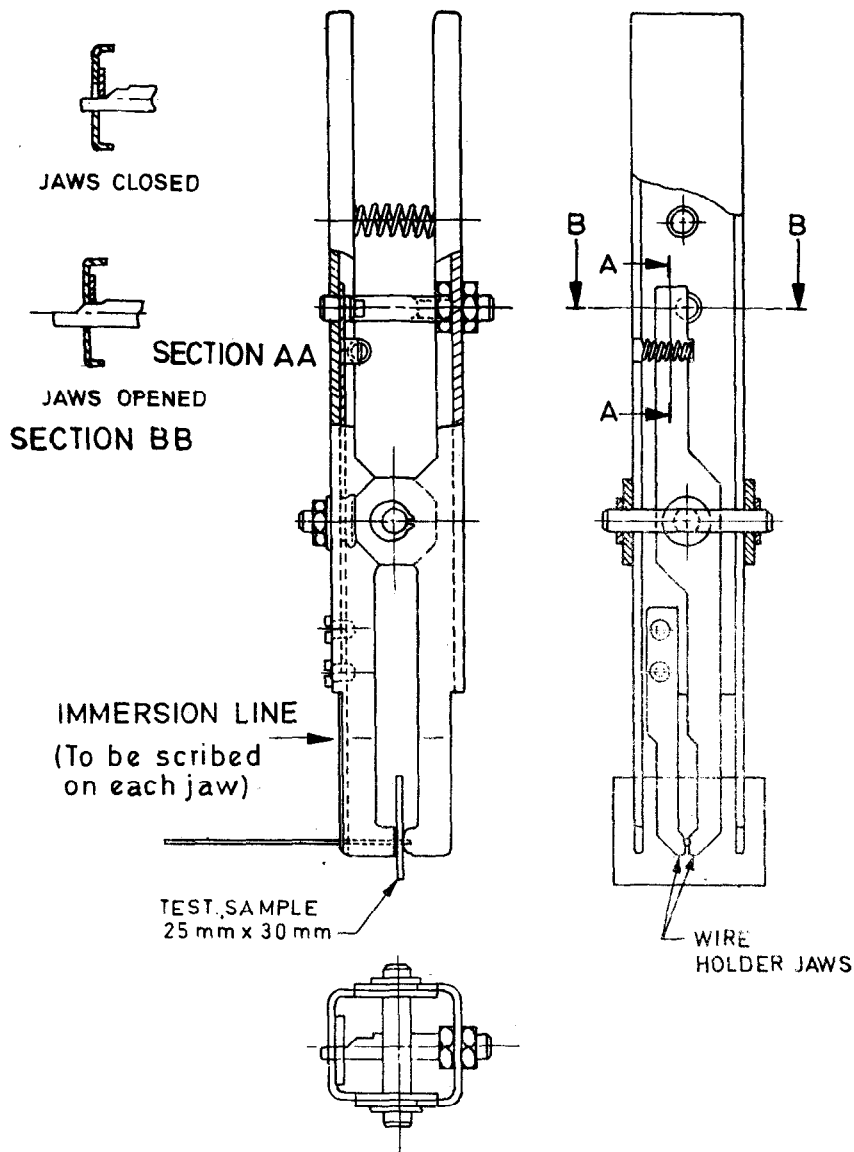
PLIER FIXTURE FOR THERMAL SHOCK TEST, DIP SOLDERING
